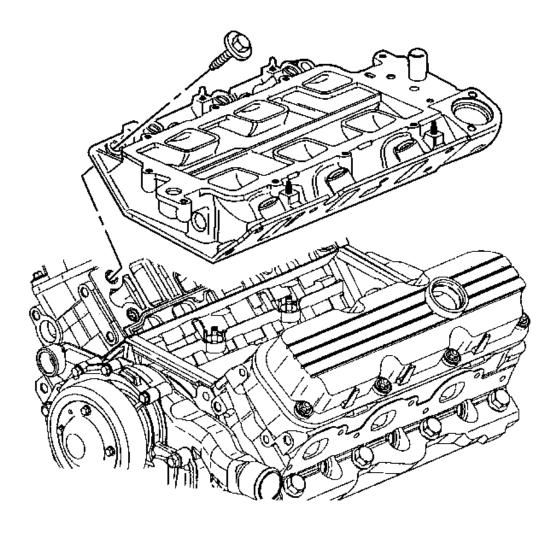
Lower Intake Manifold Seals Courtesy of GENERAL MOTORS CORP.
